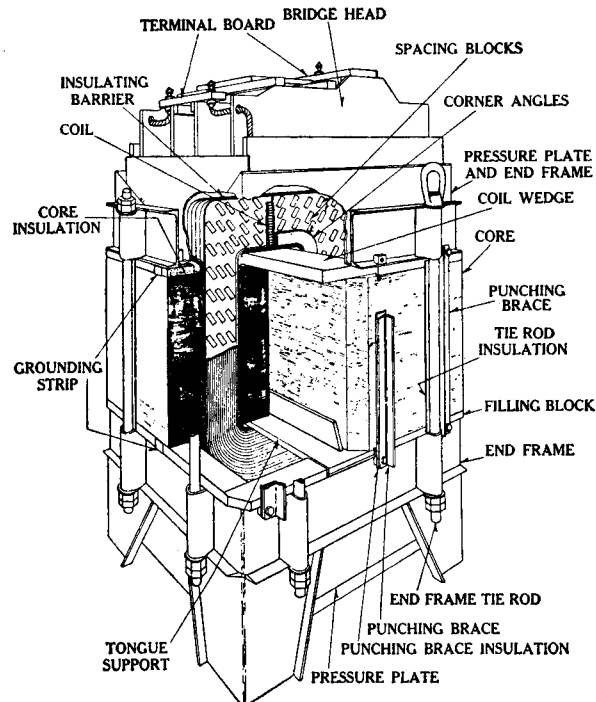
SECTIONAL VIEW OF A LARGE SINGLE-PHASE SHELL FORM TRANSFORMER
